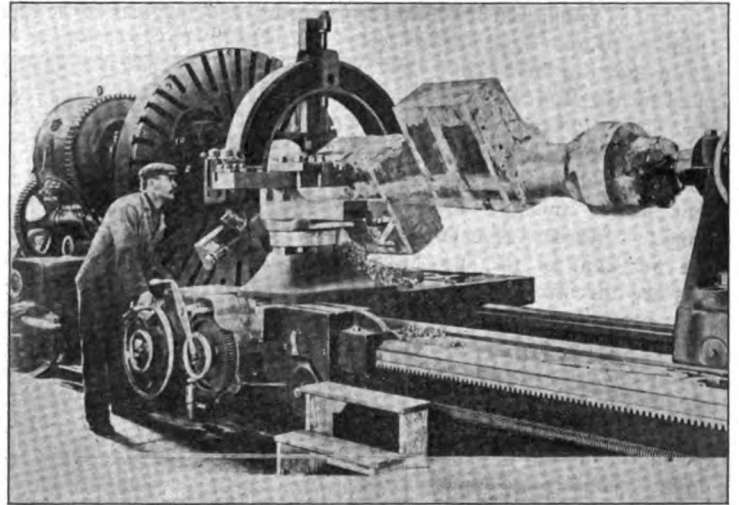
MOTOR-DRIVEN LATHE TURNING CRANK SHAFT FORGING.
